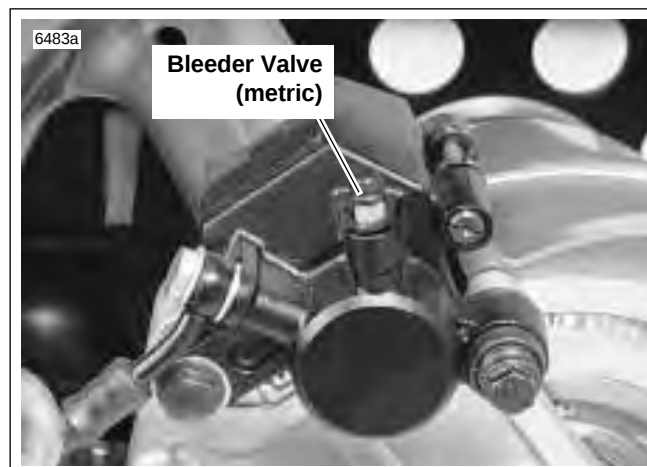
Rear Caliper Bleeder Valve (Metric)
